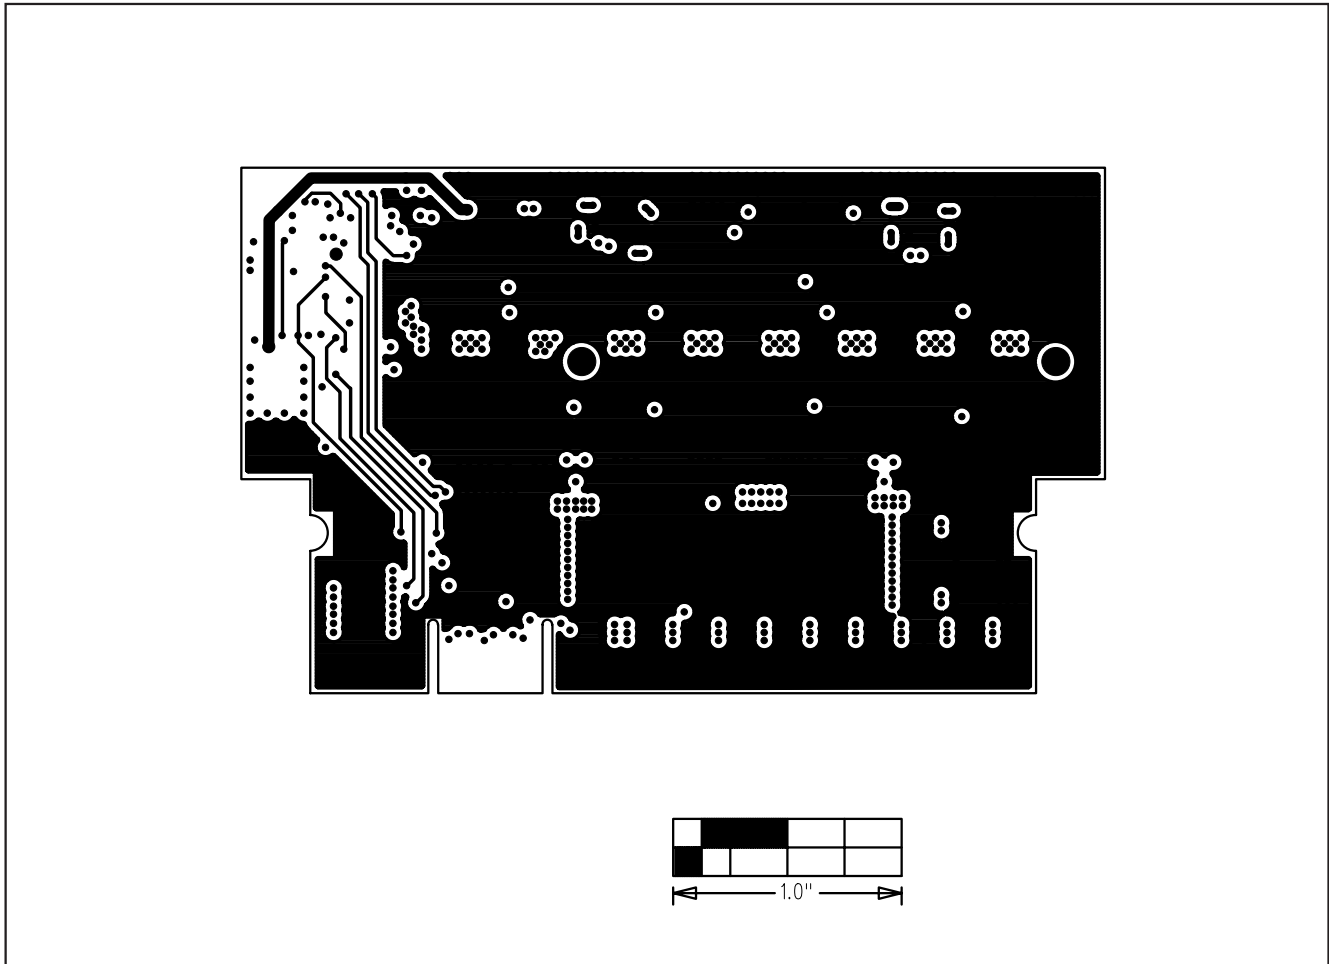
MAX8525 EV Kit PC Board Layout—GND Layer 5
